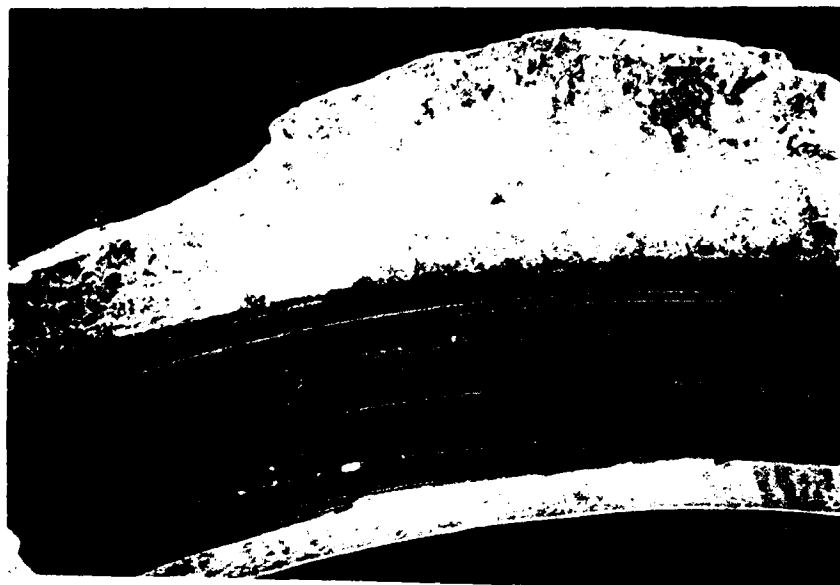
FRACTURE SURFACE OF FAILED LINK SHOWING INTERGRANULAR FAILURE
